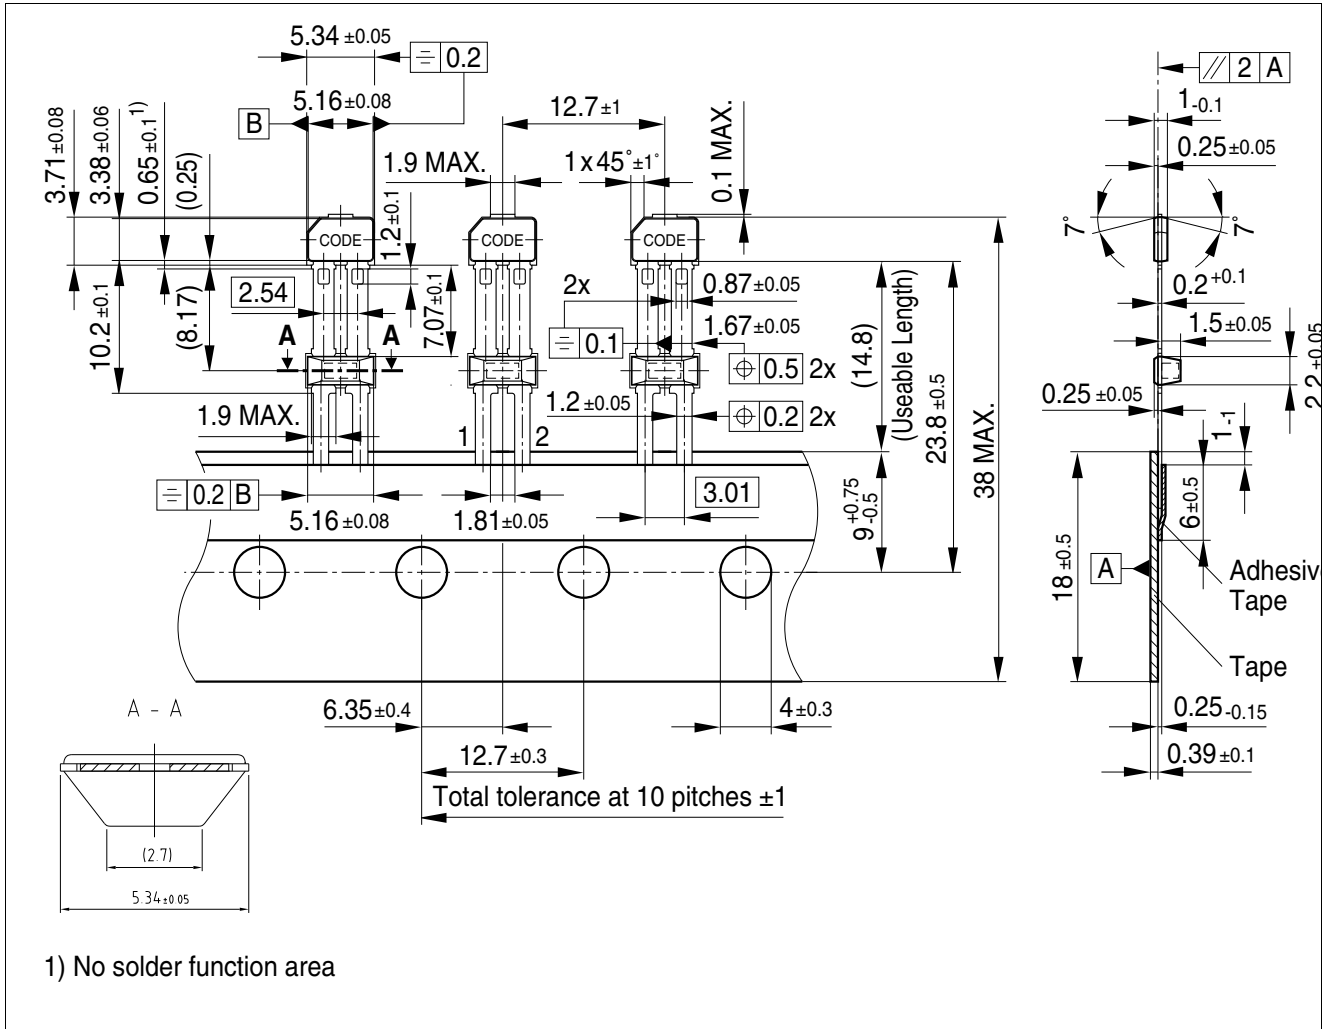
PG-SSO-2-4 (Plastic Single Small Outline Package); Dimensions in mm
